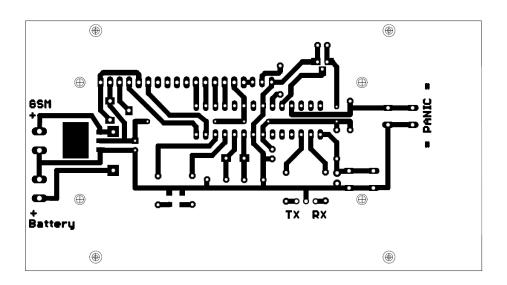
EAGLE Programmable Circuit Board(PCB) Drawing
